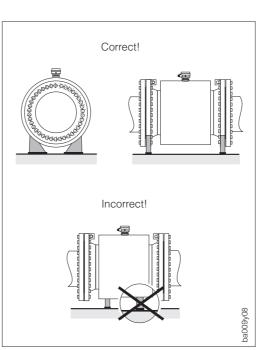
The proper way to support large diameter sensors ($DN \ge 350$)
